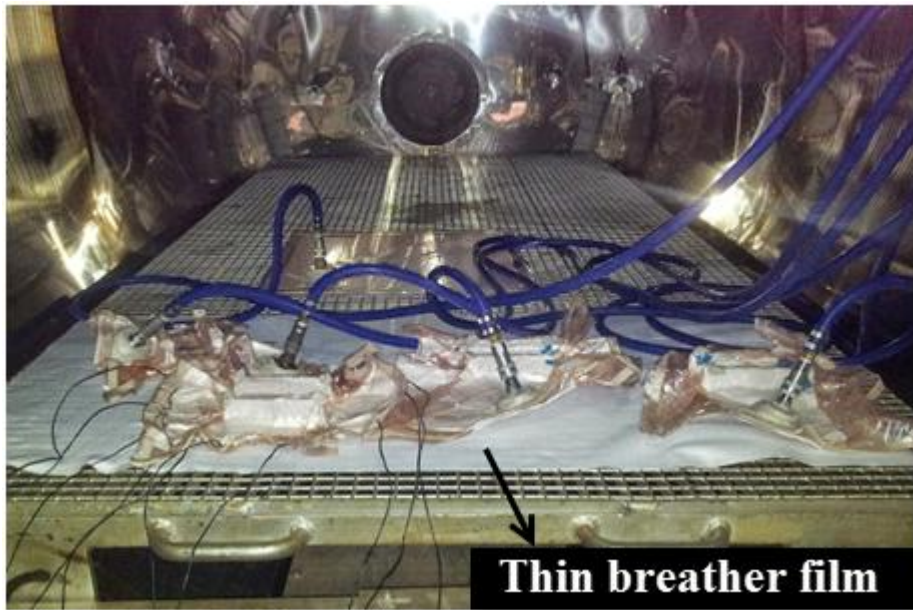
Vacuum bagged manufacturing assemblies inside the autoclave chamber
